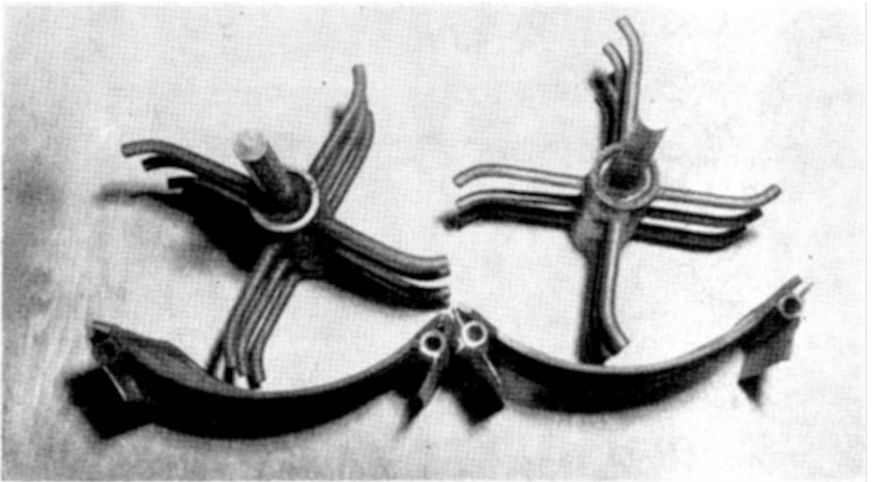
Relative position of spike-tooth cylinders and screening surfaces in the cylinder conveyor.
